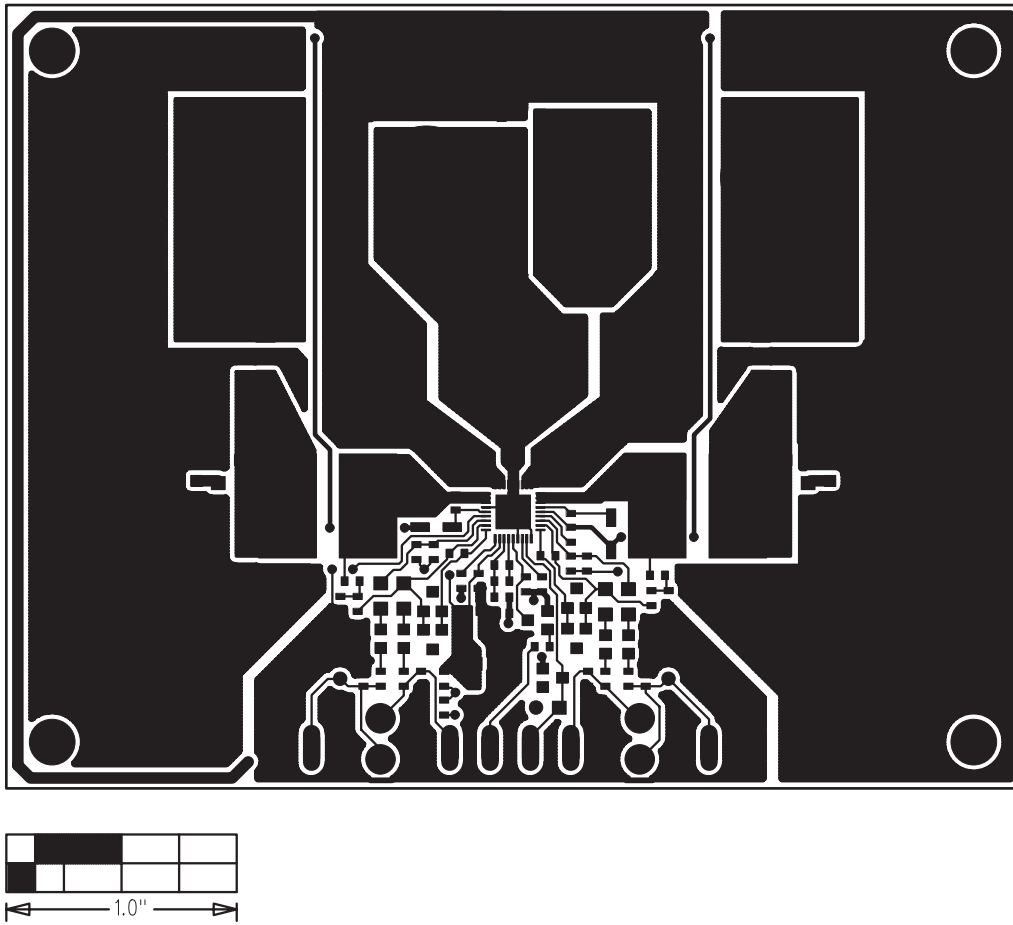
MAX9742 EV Kit PCB Layout—Component Side
